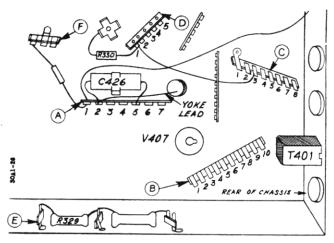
Original "Fused Chassis" Connections (Before Wiring Modification).
